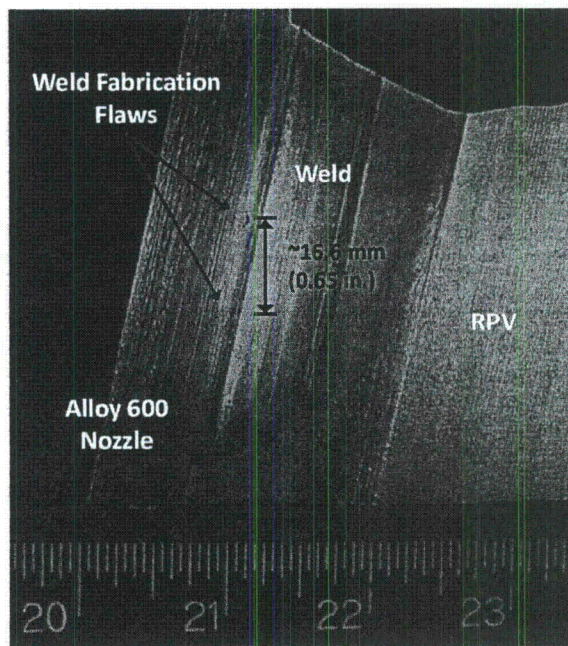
The 95-Degree Surface Shows Two Fabrication Flaws at the Alloy 600 Tube-to-Weld Interface
